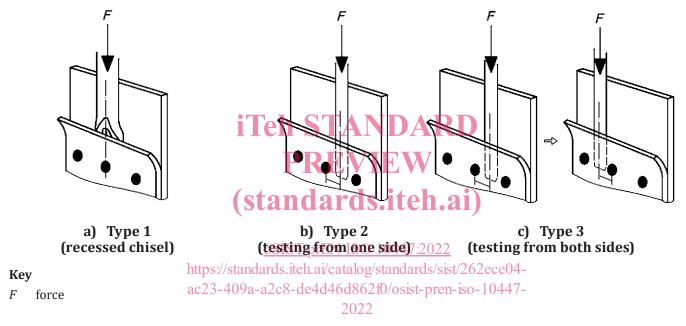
Testing of resistance spot and protection welded joints
